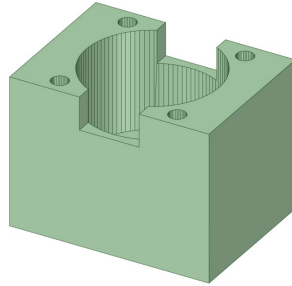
Part shape to be machined in the experiment shown in Section 3.1.
